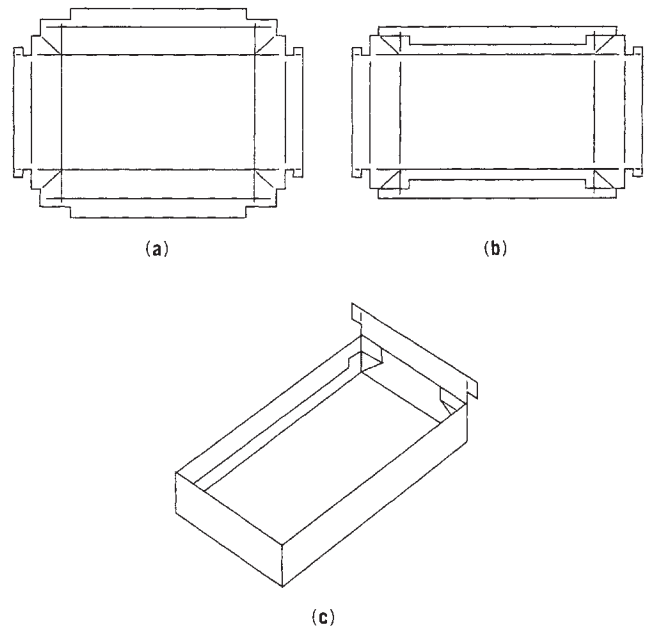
Tuck-end carton: (a) blank; (b) erected carton for loading.
